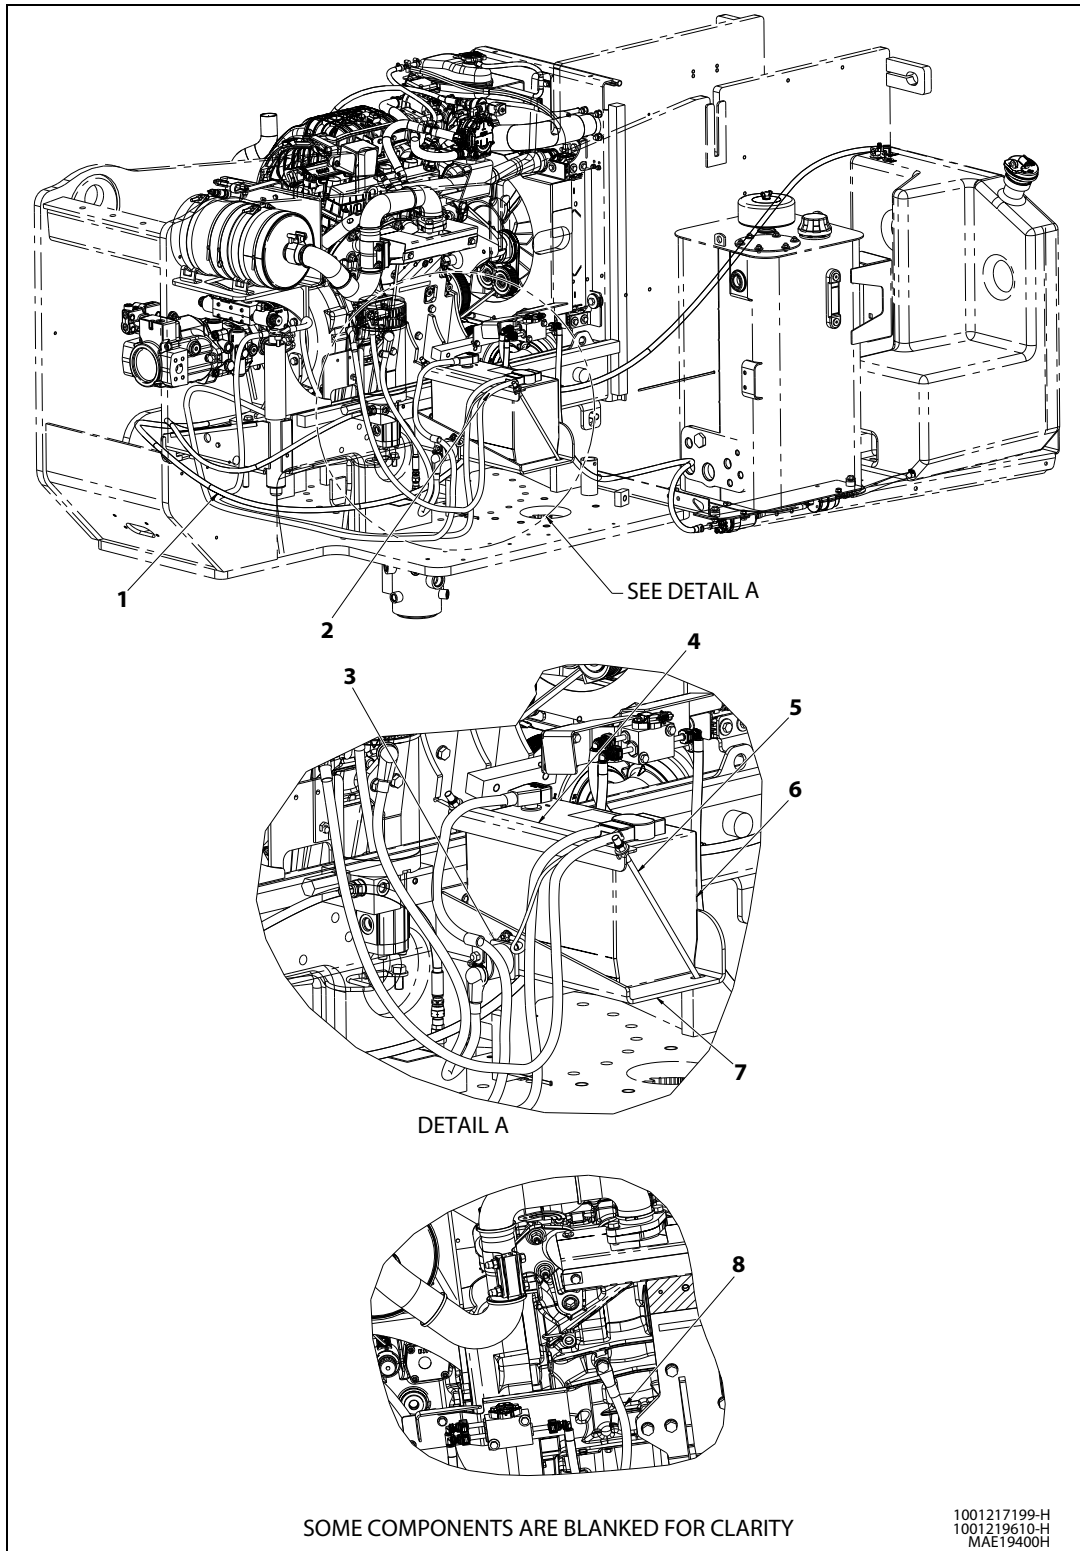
Ford Engine Installation - Sheet 2 of 5
